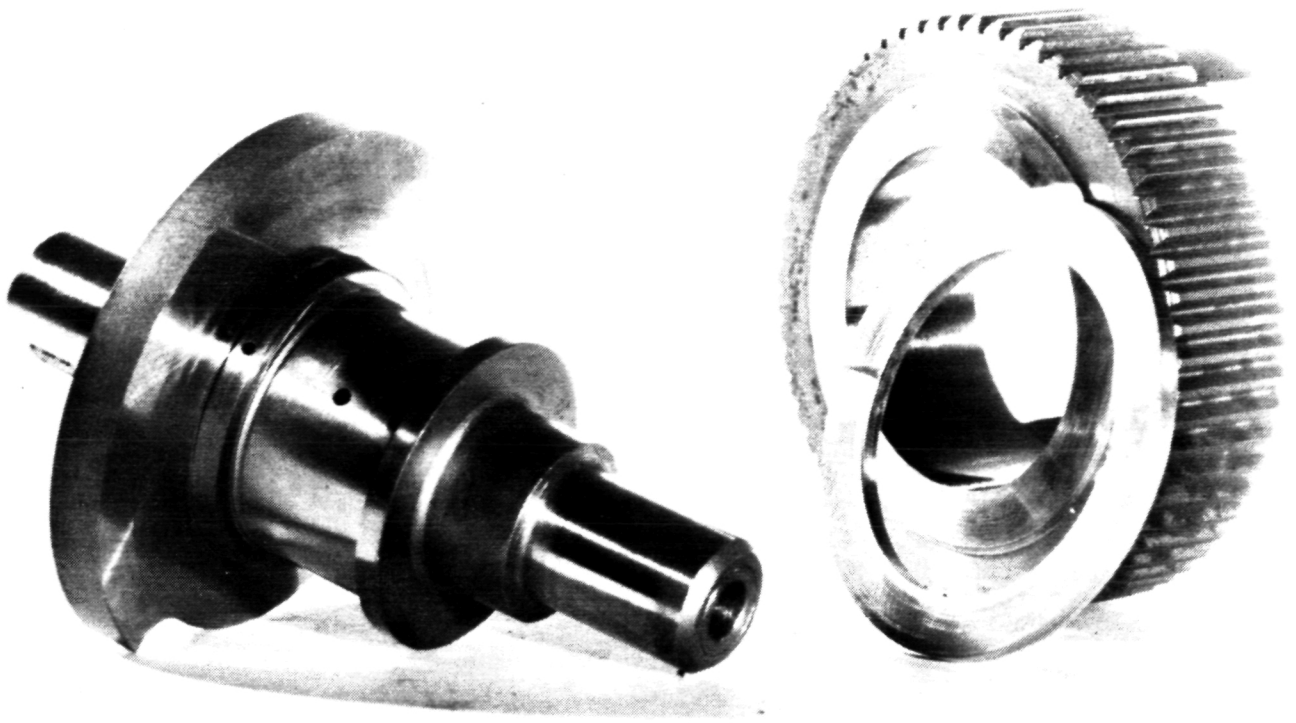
Regenerator drive counterbalance, thrust washer, and pinion.
